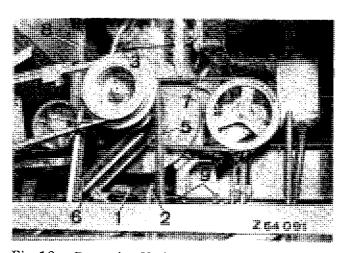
Removing Various Engine Connections Near Drive Pulley
